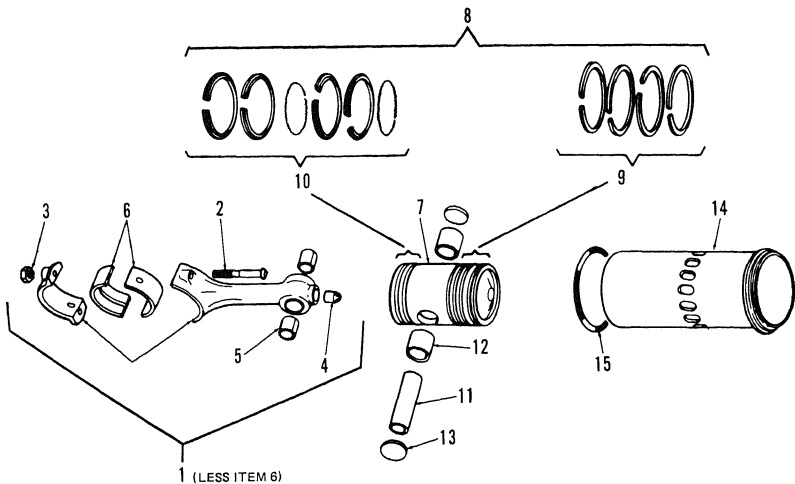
CONNECTING ROD, PISTON AND LINER
